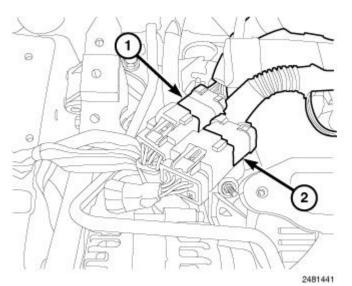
Identifying Fuel Injector Electrical Connectors Courtesy of CHRYSLER LLC
